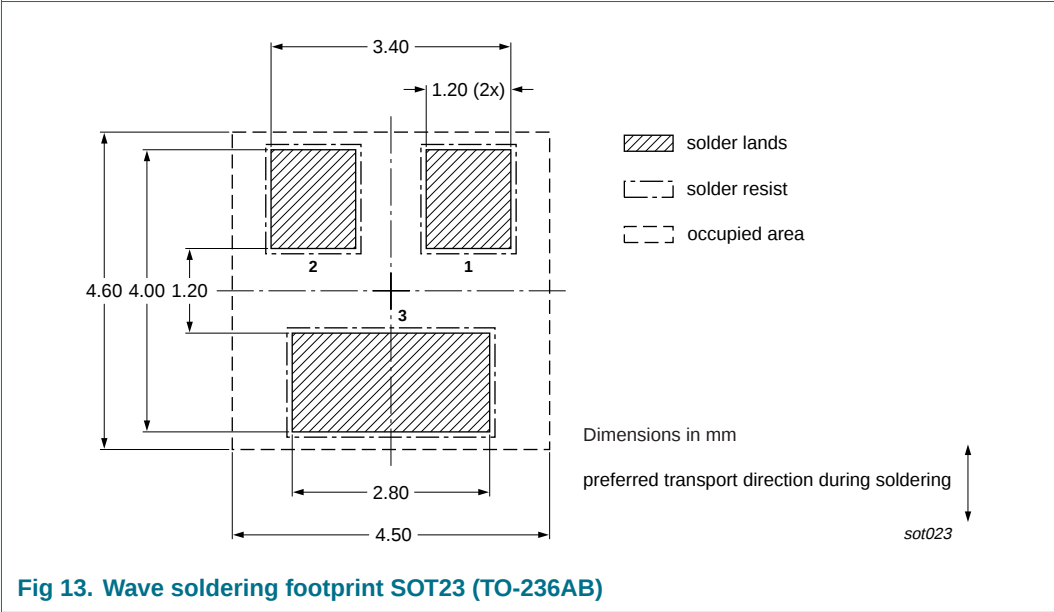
Wave soldering footprint SOT23 (TO-236AB)
